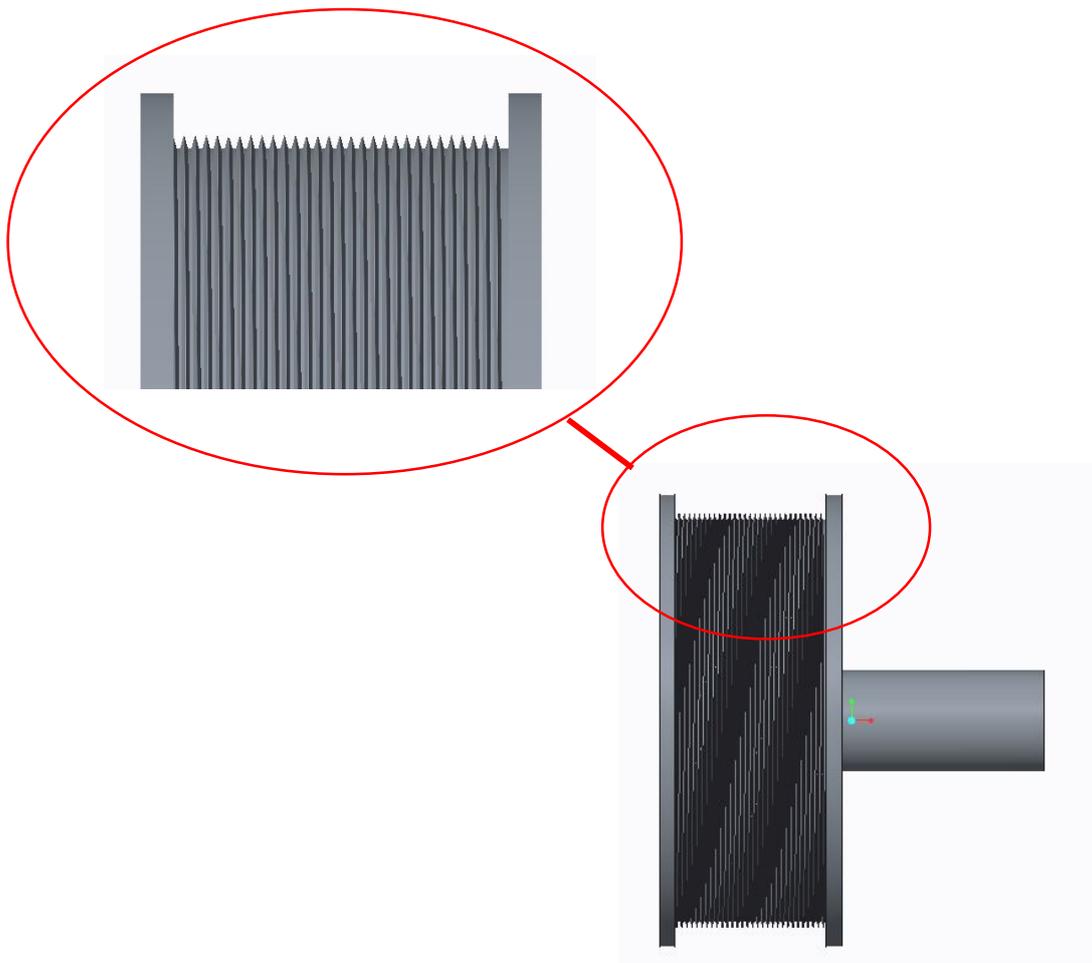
A diagram showing the detail of the coiled cable mechanism.
